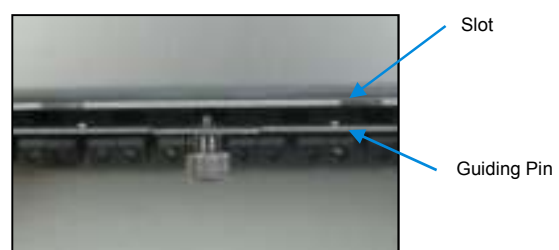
Front Plate Guiding Pins and Slots, ii
